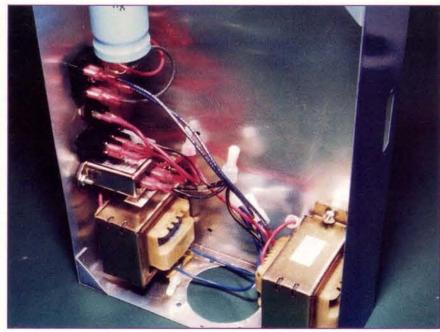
Power supply components installed in chassis. All connections to the transformers are made with closed-end crimp connectors, but all connections to the power entry module, switch, and rectifier bridge are made with insulated 1/4" quick disconnects. This way, all components can be changed out from the chassis without unsoldering or cutting any wires.
